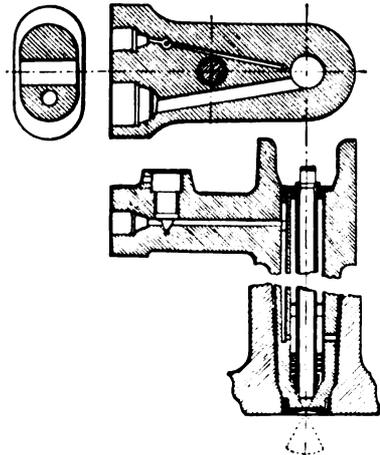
Section through Fuel Injection Valve Box (Diesel Engine).
